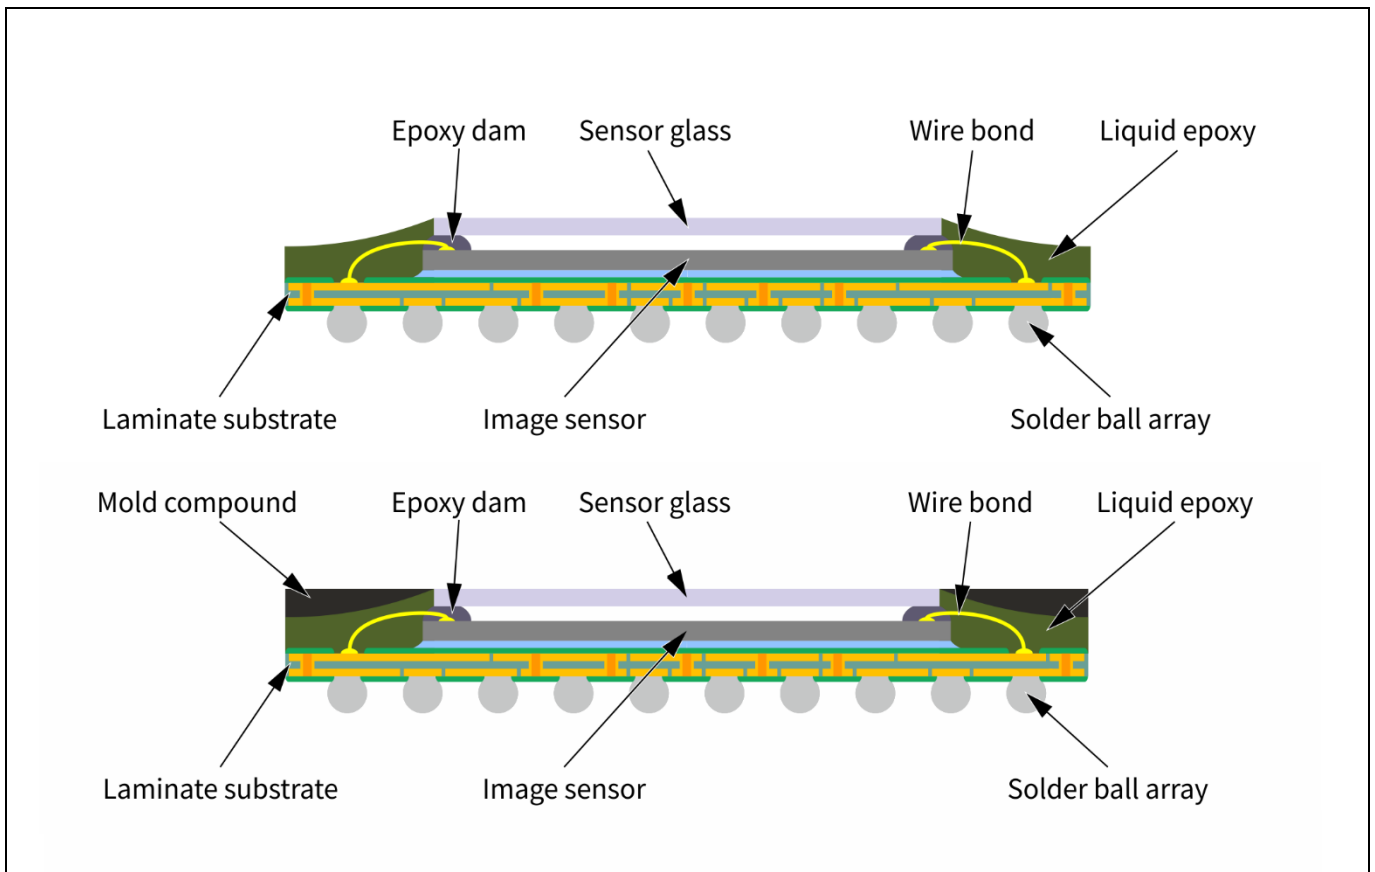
Schematic of the inner setup of the optical sensor LFBGA package without (top) and with overmolding (below).
